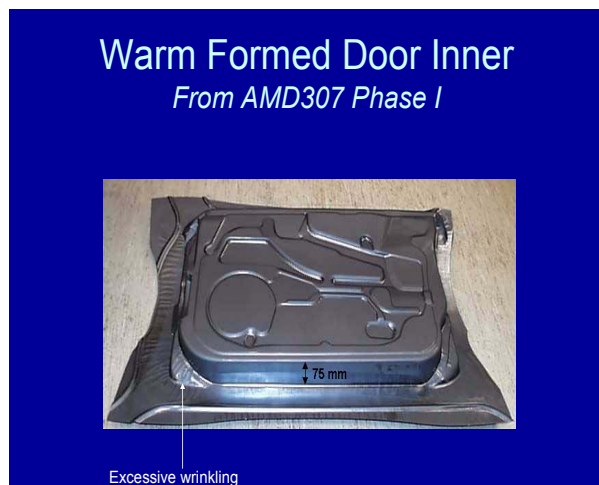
Warm formed door inner made in Phase I die showing excessive wrinkling and sheet distortion.
